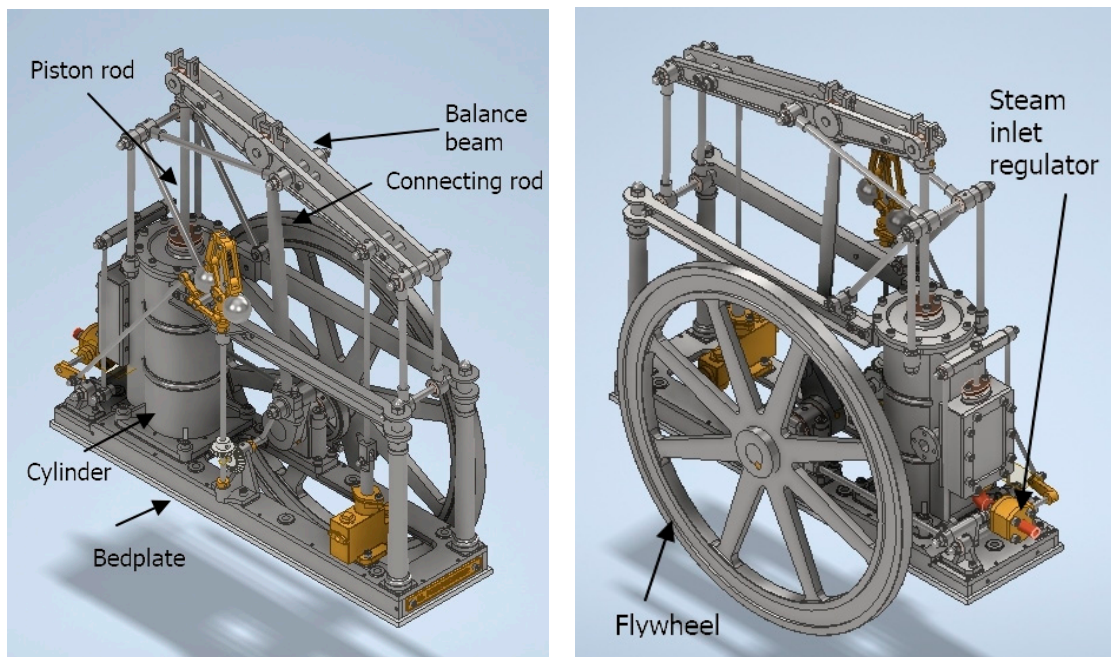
Assembly of the machine: front view (left) and rear view (right).
